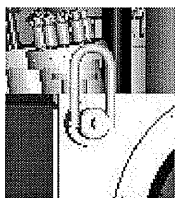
Close-up view of typical hoist ring and welded boss on DFBX vacuum box end plate.
